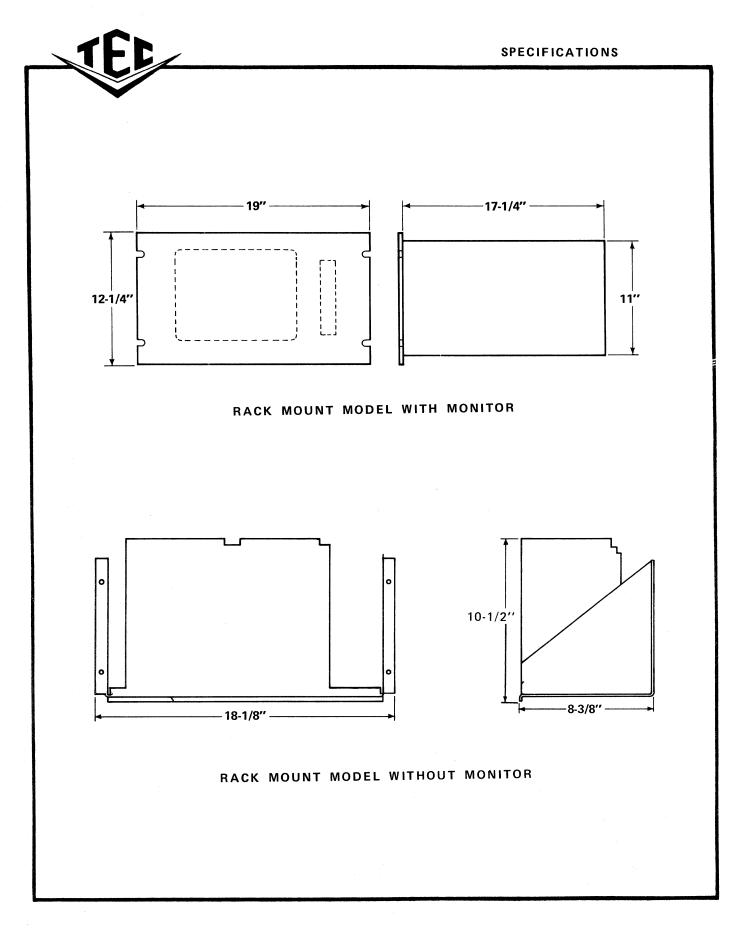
RACK MOUNT MODEL DIMENSIONS
